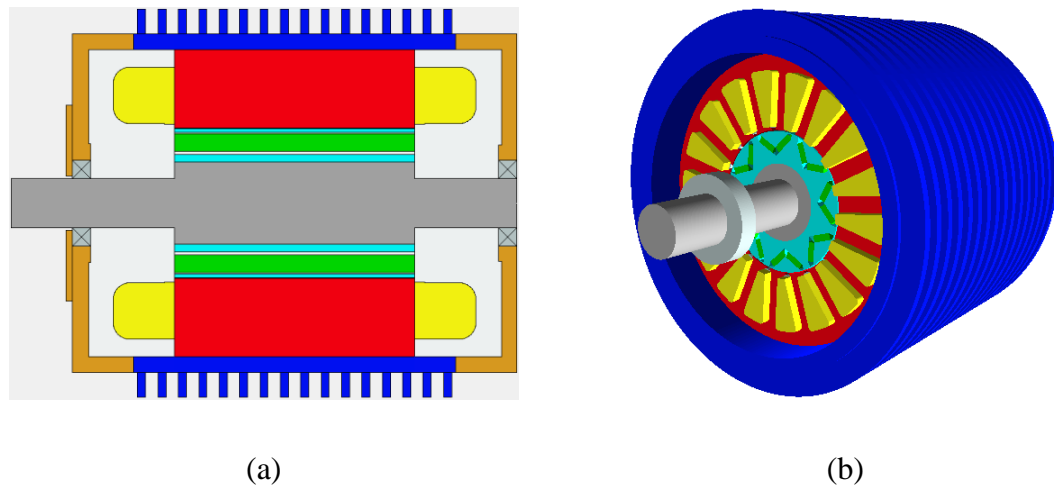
(a). Axial view and (b). 3D view of the machine's cooling enclosure design
